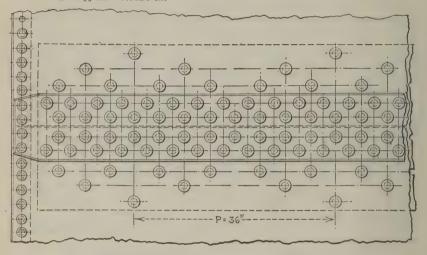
EXAMPLE OF BUTT AND DOUBLE STRAP JOINT, QUINTUPLE-RIVETED
